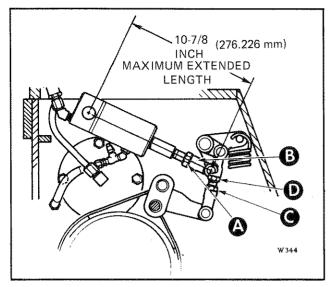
BRAKE CYLINDER ADJUSTMENT
